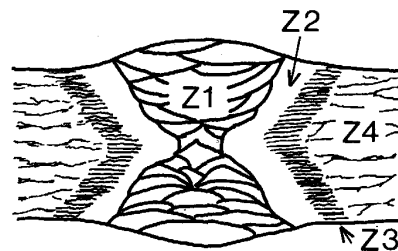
Schematic diagram of four parts (Z1, Z2, Z3 and Z4) in the Ti-15V-3Cr-3Sn-3Al alloy TIG weldment on the basis of the macroscopic observation of the weldment shown in Photo. 1.
